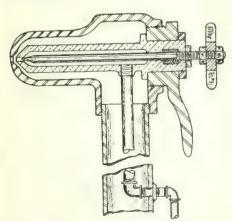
SECTION OF BURNER SHOWING INTERNAL OIL PIPE AND NEEDLE VAVLE.
